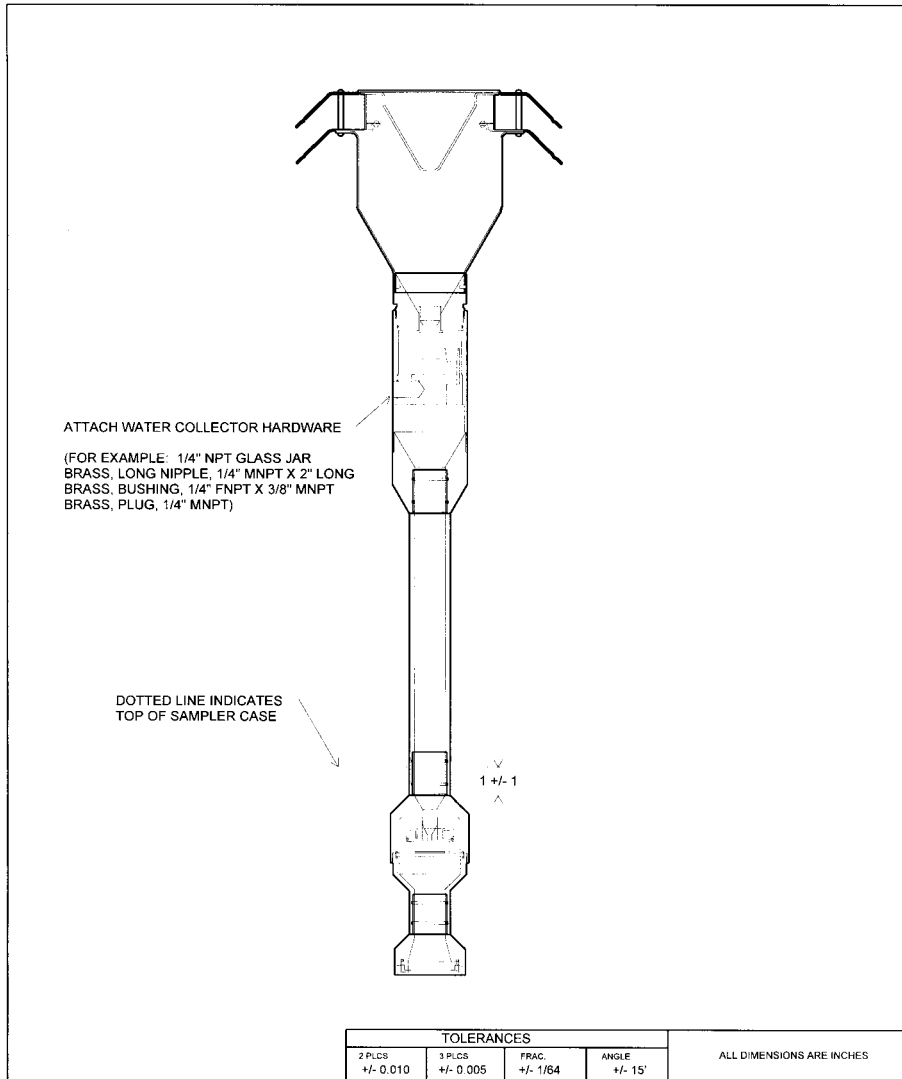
10-MICRON INLET, ASSEMBLY
